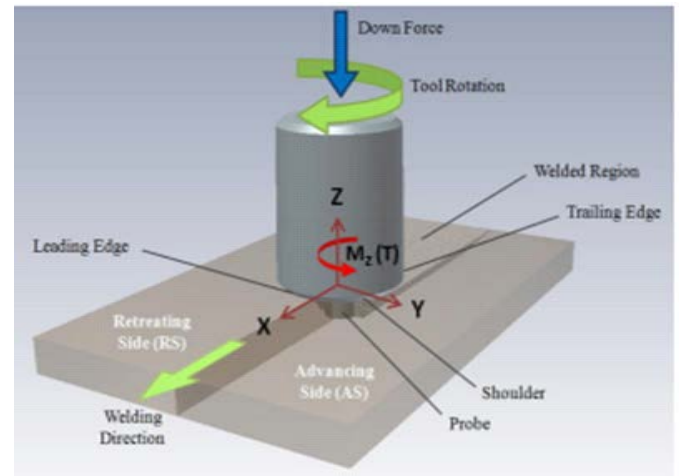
Schematic of Friction Stir Welding [6]
